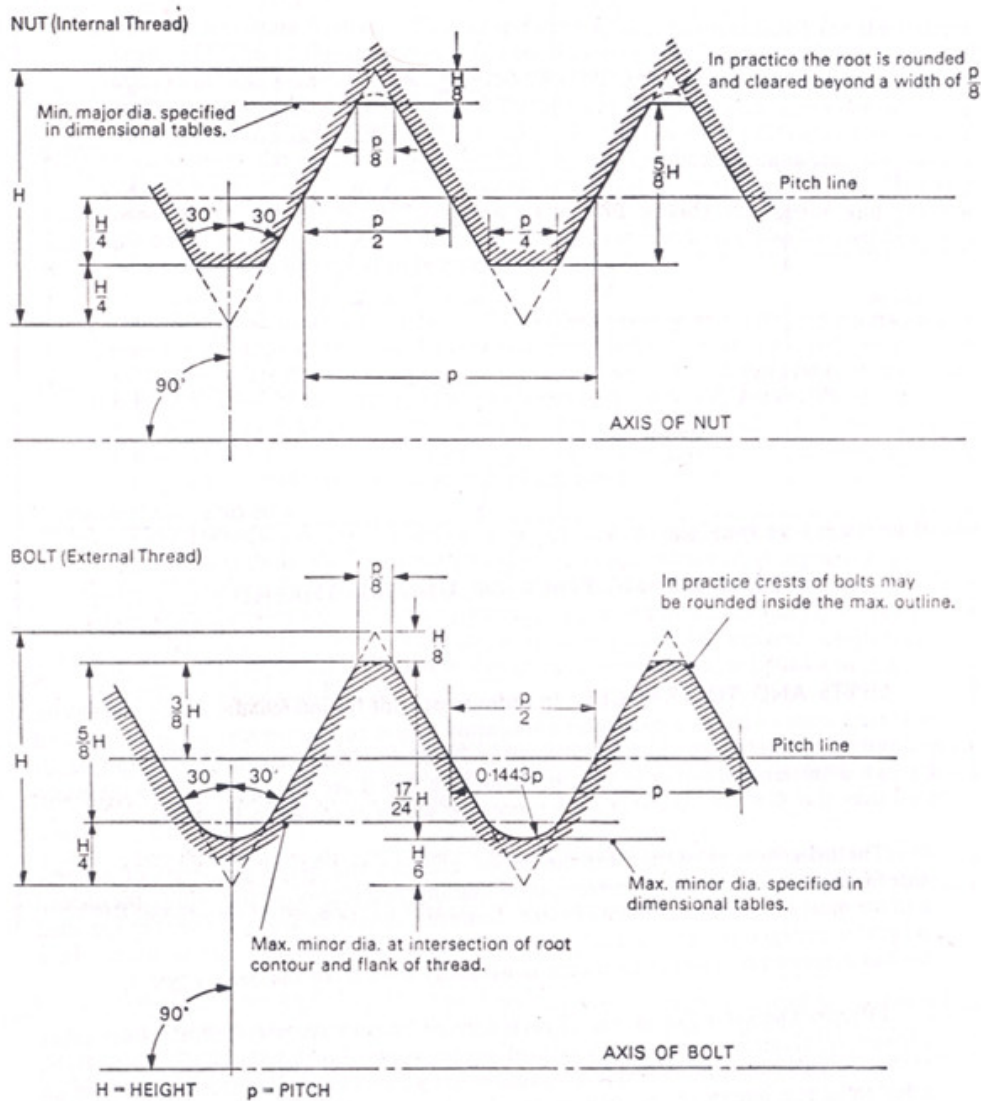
, Design form of unified thread (Maximum Metal Condition)
